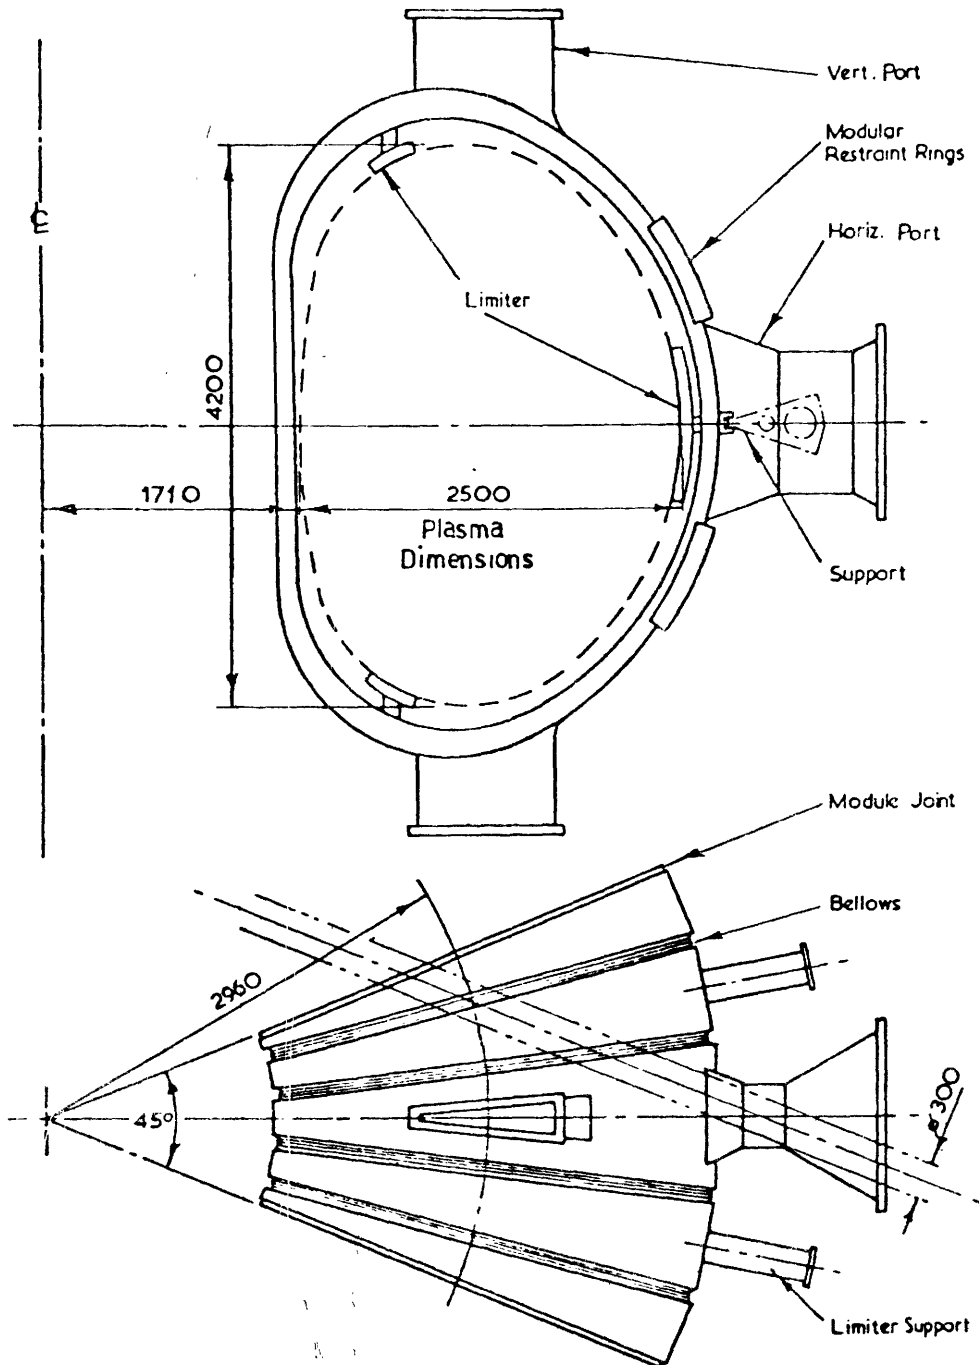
GENERAL LAY-OUT OF THE VACUUM VESSEL OCTANT (dimensions in mm).
